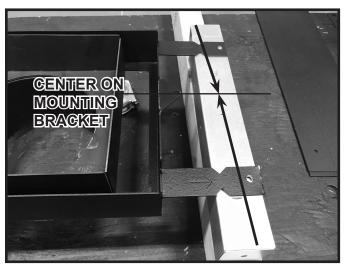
Center Discharge Assembly on Mounting Bracket
